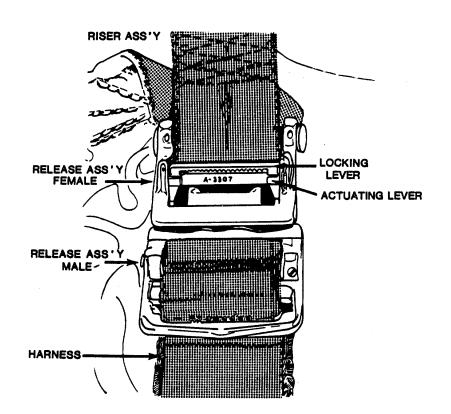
Canopy Release Assembly, Koch Type, OV-1 Ejection Seat Harness.
